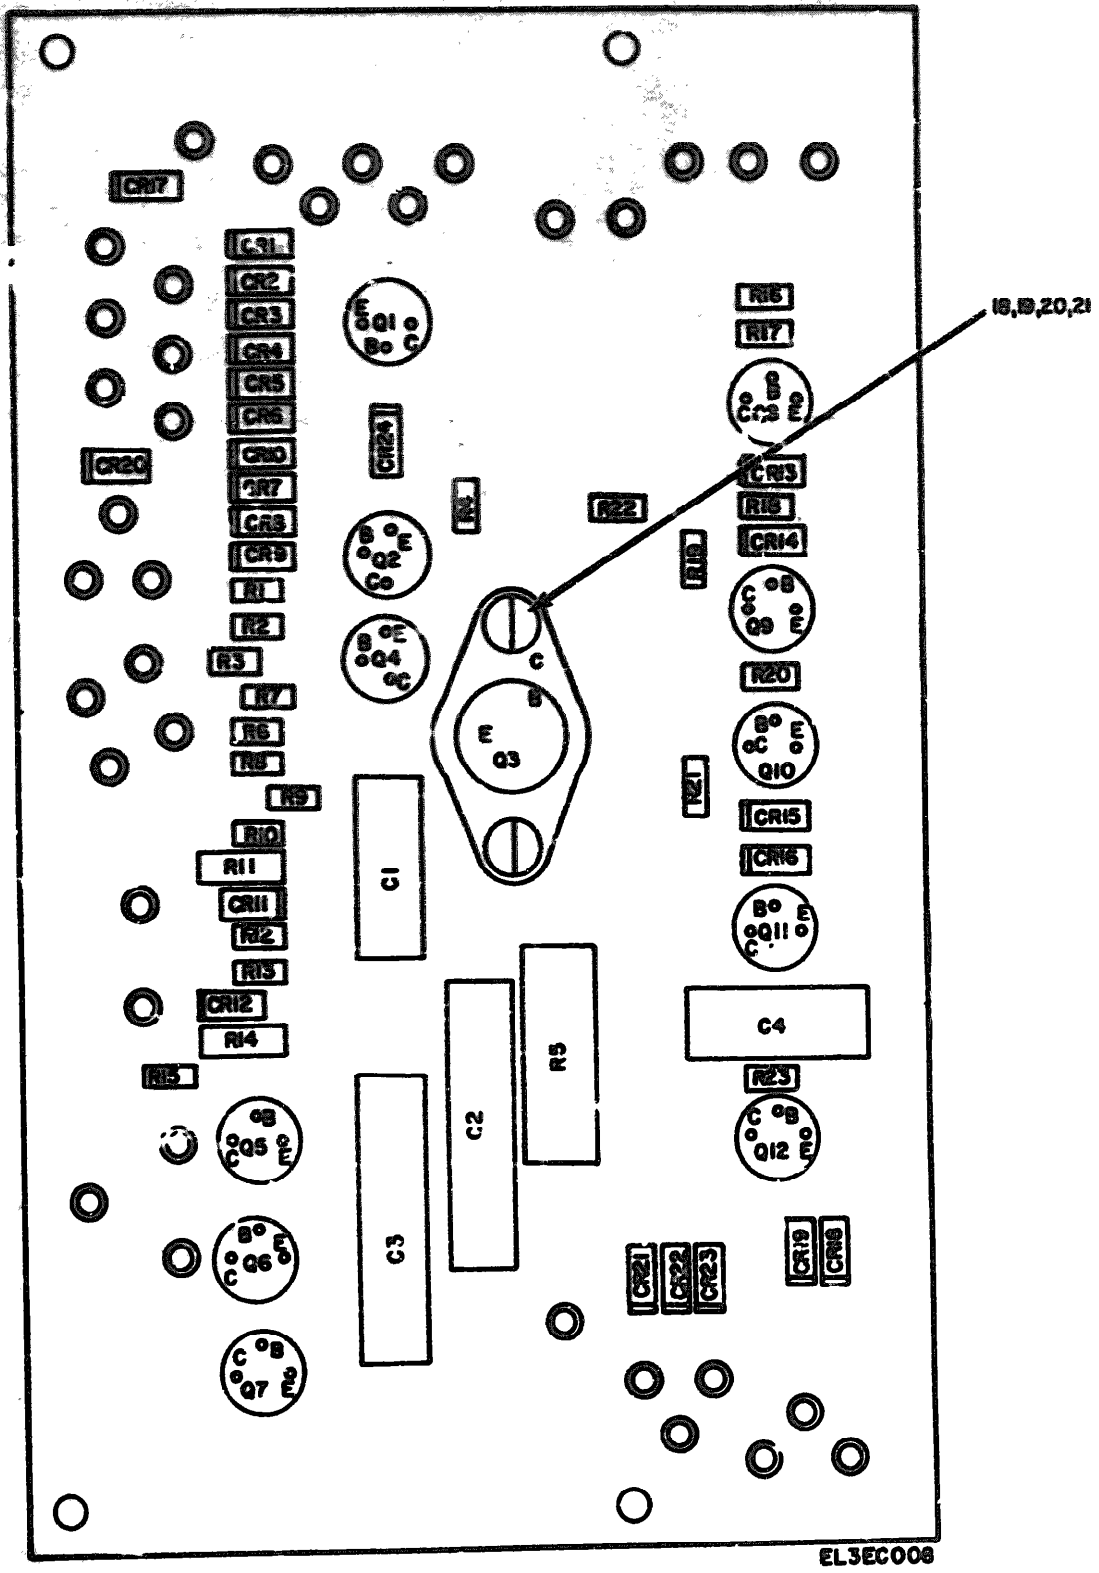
Circuit Card Assembly (A1A1A1A1) (Sheet 1 of 2).
